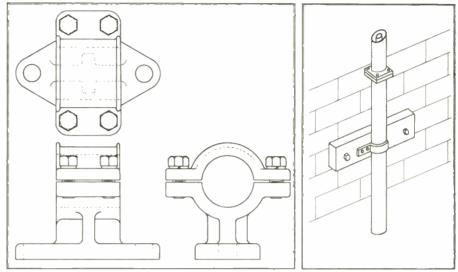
, LEFT. DETAIL OF RIGID SUPPORT TO CLAMP COAXIAL LINE. FIG. 19, RIGHT. PIPE STRAPS OR CONDUIT CLAMPS PERMIT LONGITUDINAL MOTION
